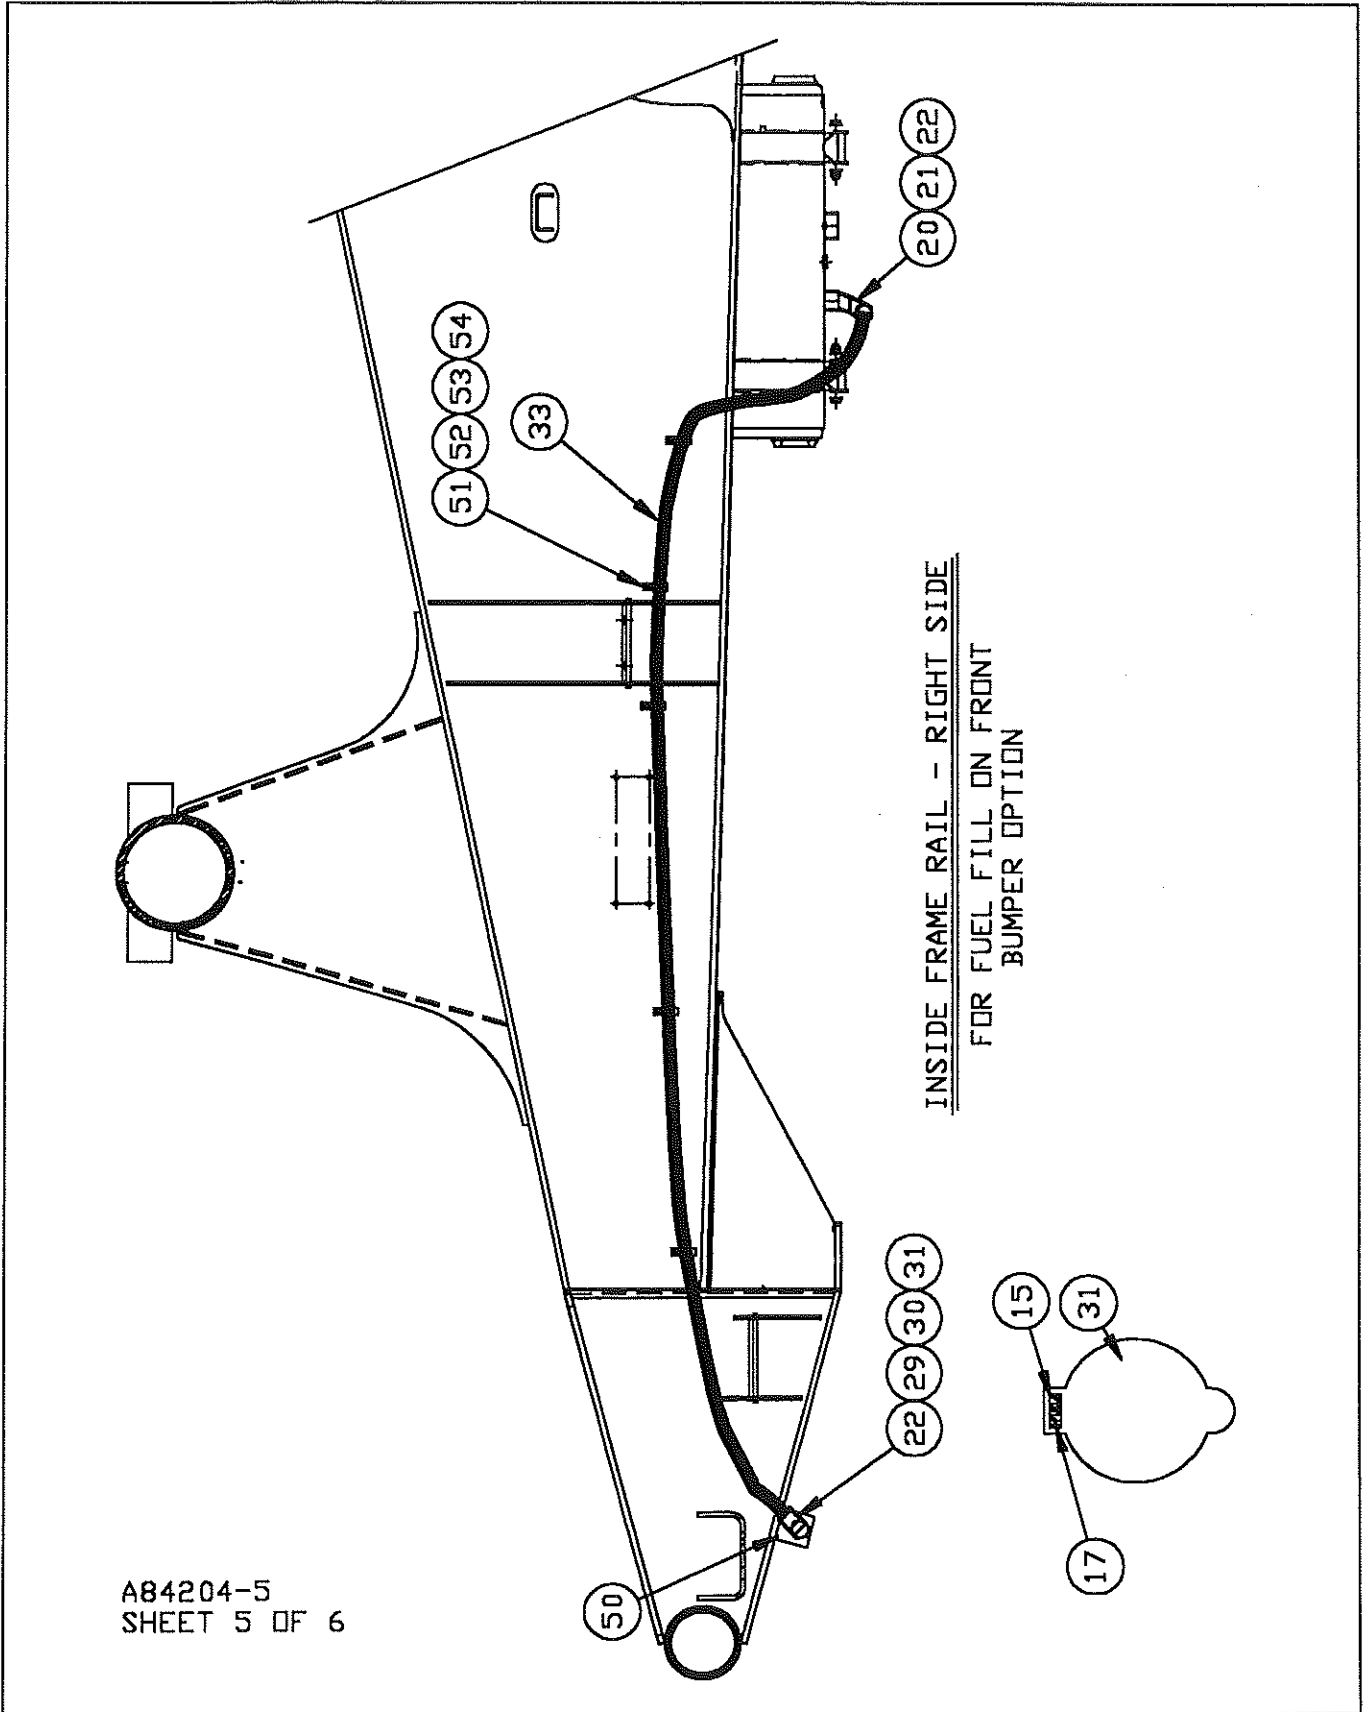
FUEL TANK ASSEMBLY - CONTINUED
